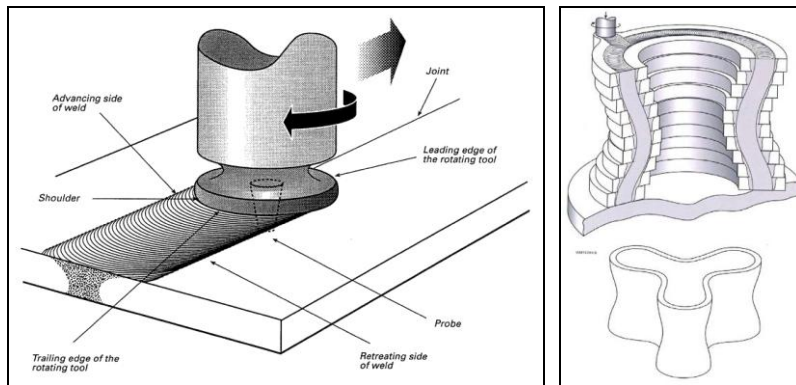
Schematic representation of (left) friction stir butt welding process [3], and (right) Pro-Stir™ technique [4]
